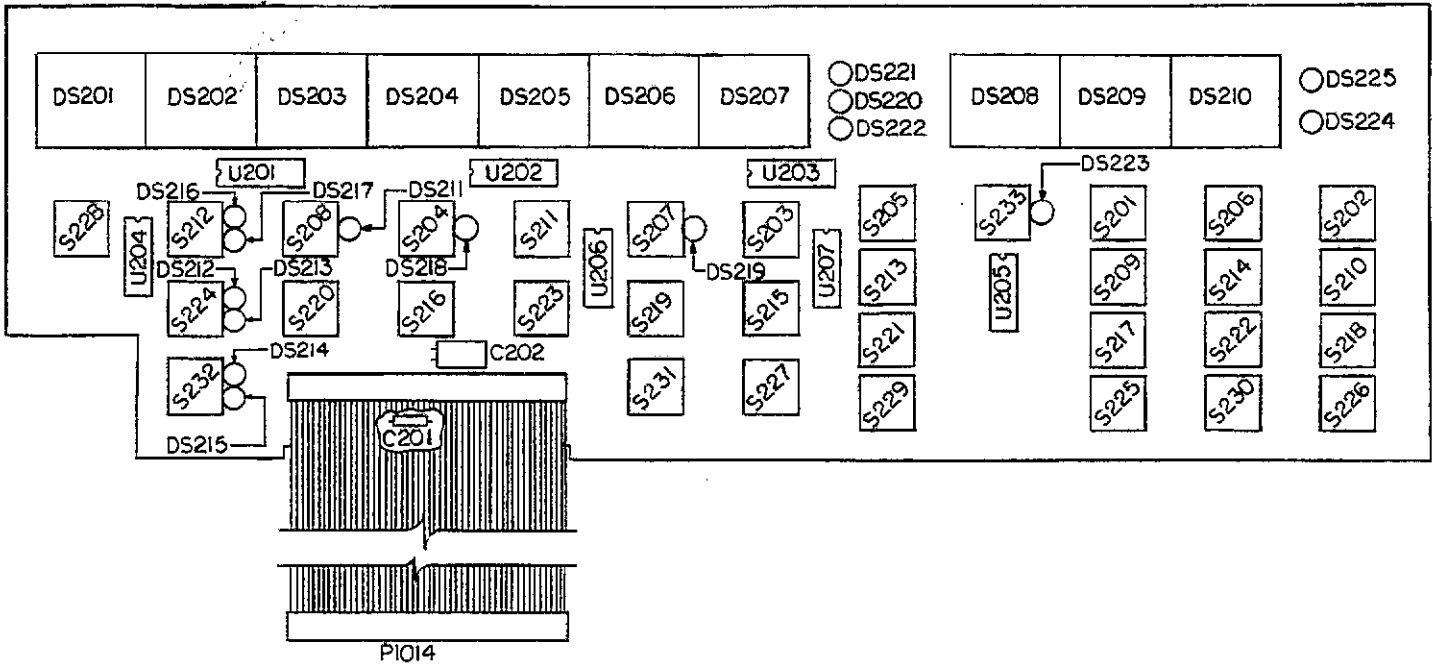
Display Board, Component Location Drawing, Dwg. No. 590-110
